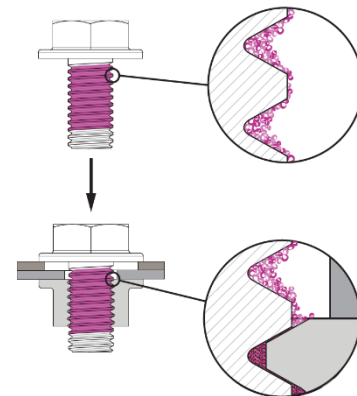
Pre-applied thread locker is activated upon assembly of the bolted joint.
